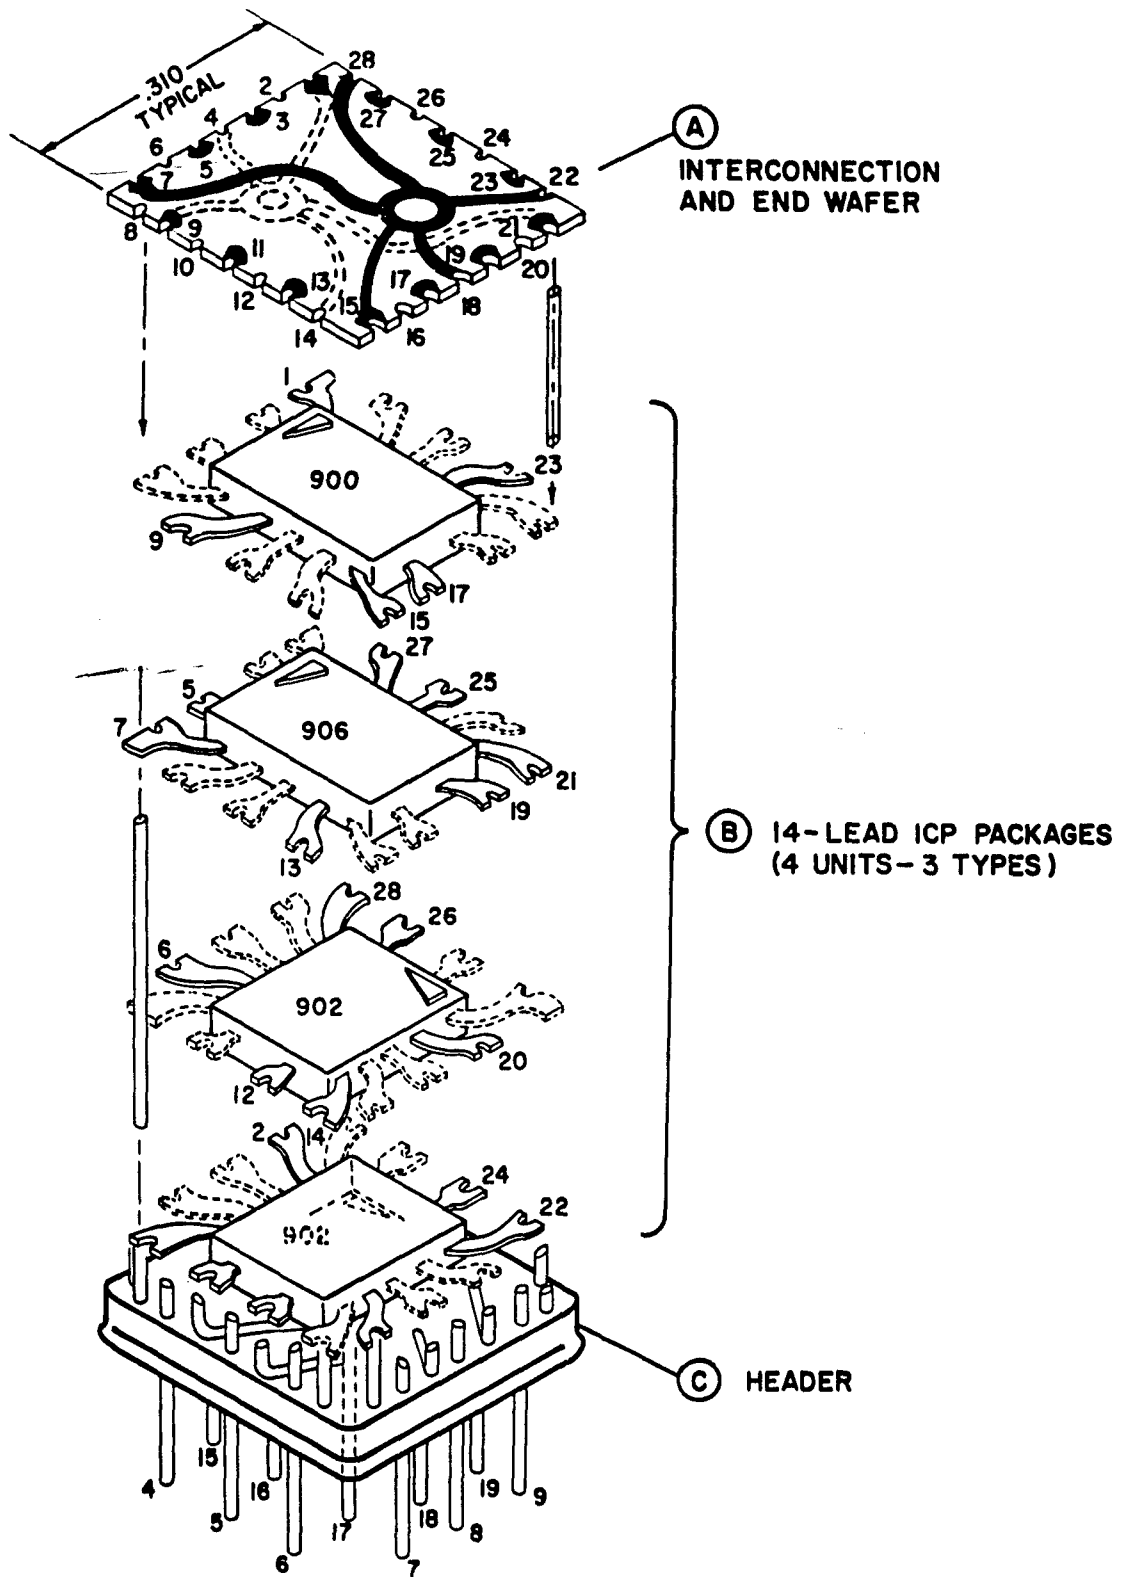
Typical ICM Construction Showing Assembly Sequence of Four ICP Packages
